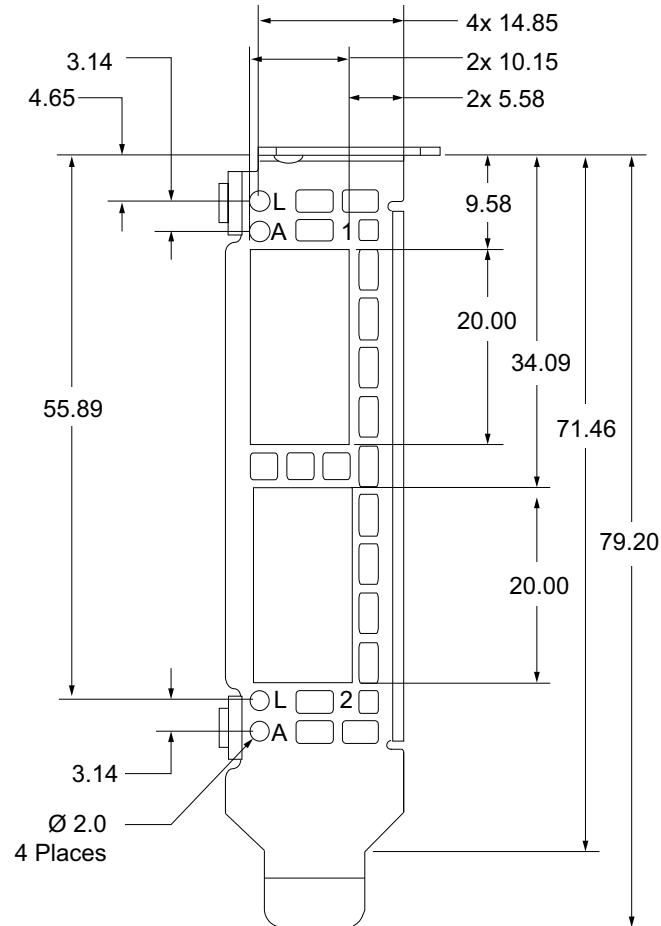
Standard-Profile Bracket Outline and Dimensions (in millimeters)
